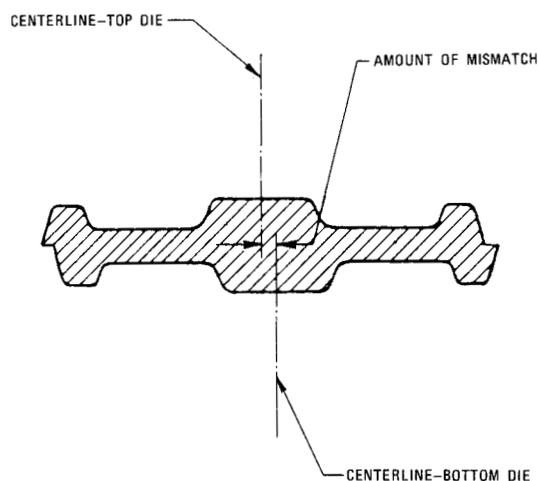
Mismatch or Forging Die Shift (from Ref. 26).
